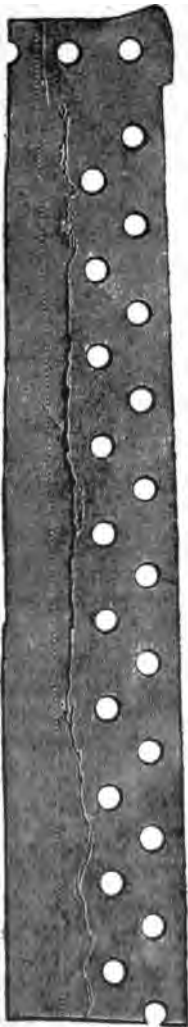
SECTION OF A BOILER PLATE WITH A LAP-JOINT CRACK.
